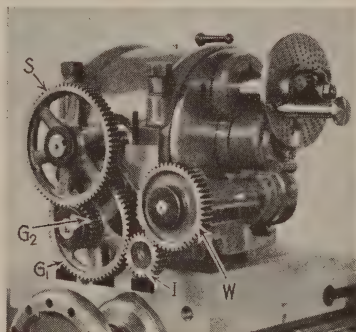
Brown & Sharpe index head geared for 319 divisions.
